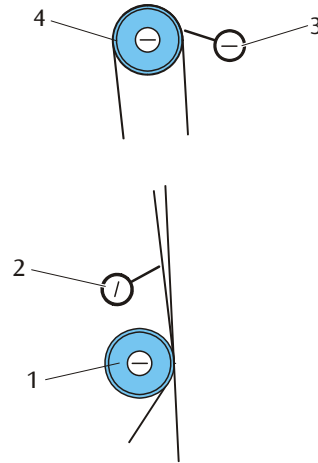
Positioning the edges (1 Idler pulley, 2 Bottom metal edge, 3 Top metal edge, 4 Deflection pulley)
